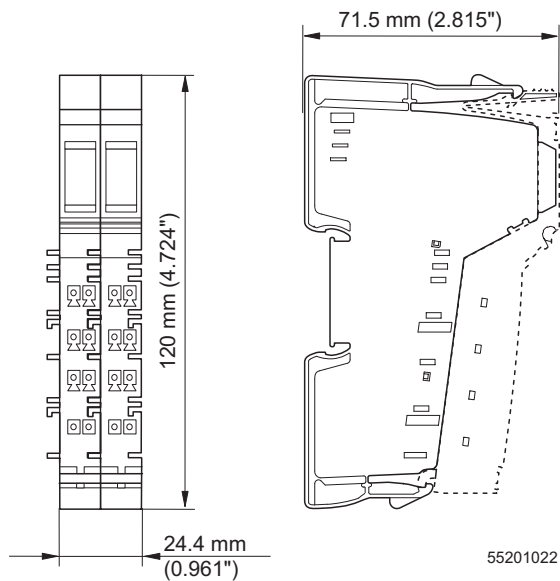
Dimensions of the electronics bases (4-slot housing)
